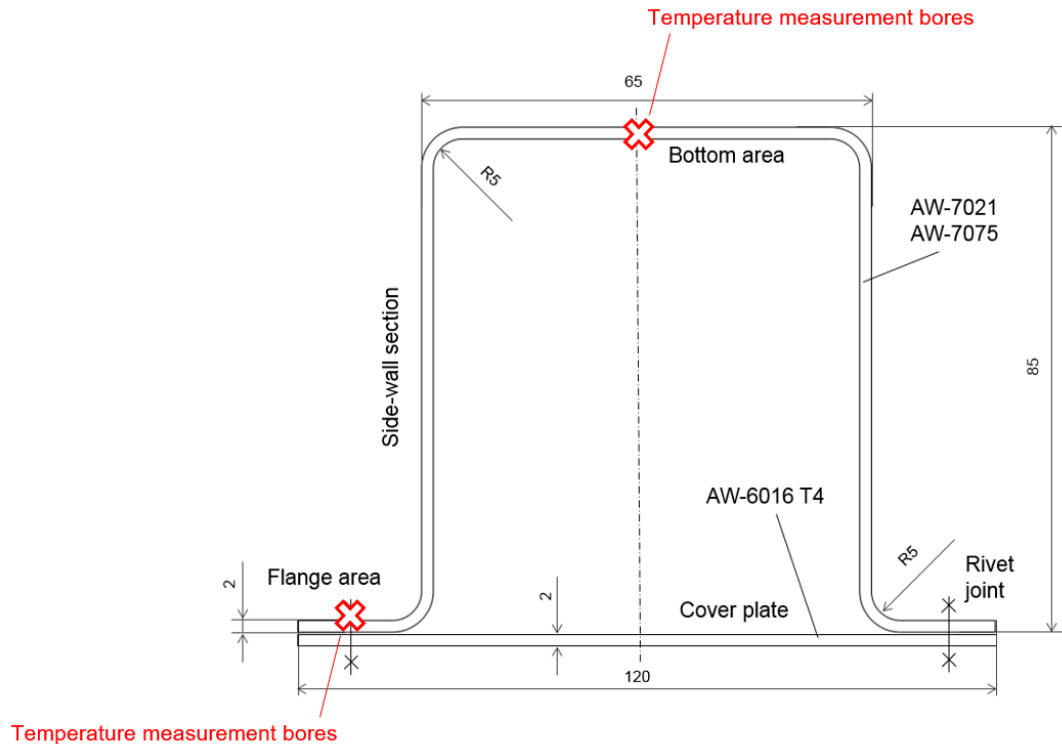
Hat-type profile for hot forming. The cover plate of 6016 is not relevant for die quenching. Dimensions in mm.
